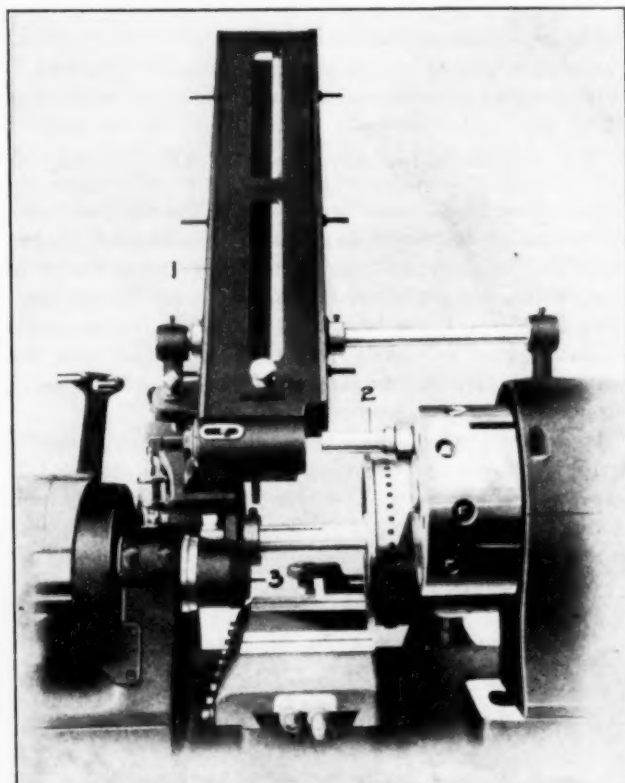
TILTING MAGAZINE ATTACHMENT. CLEVELAND AUTOMATIC MACHINE COMPANY
